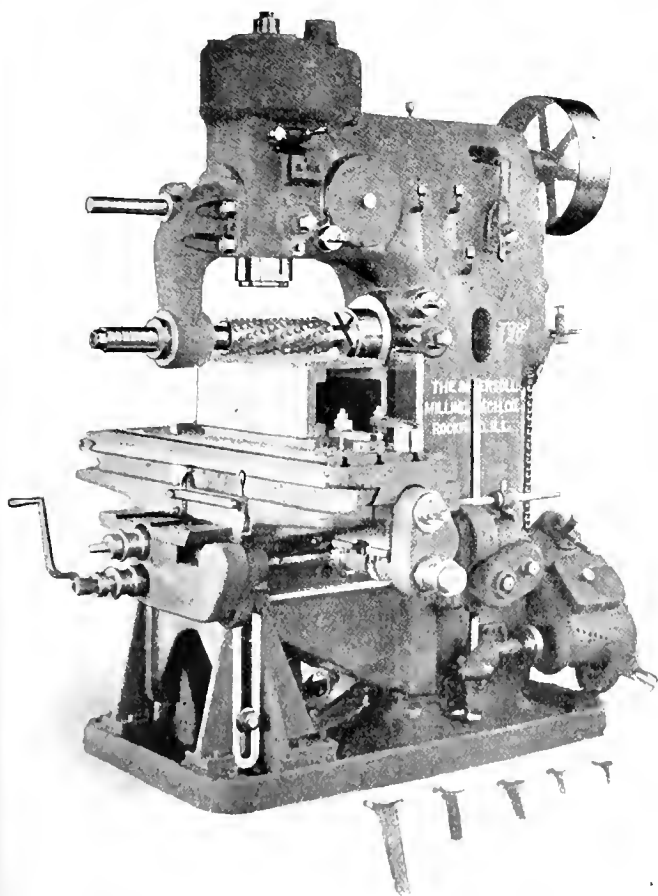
Using the Machine as a Plain Horizontal Miller.
